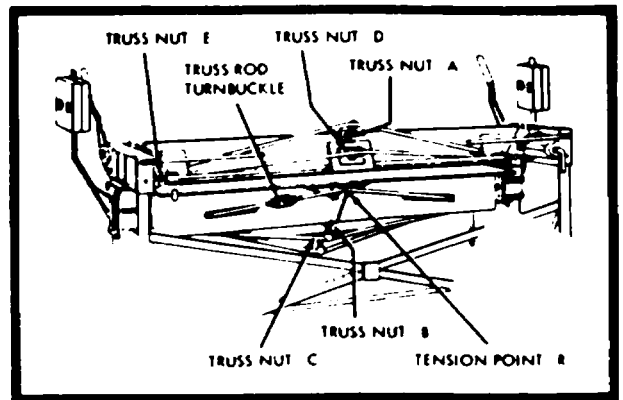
Rear View of Brake Showing Tension Adjustment Points
